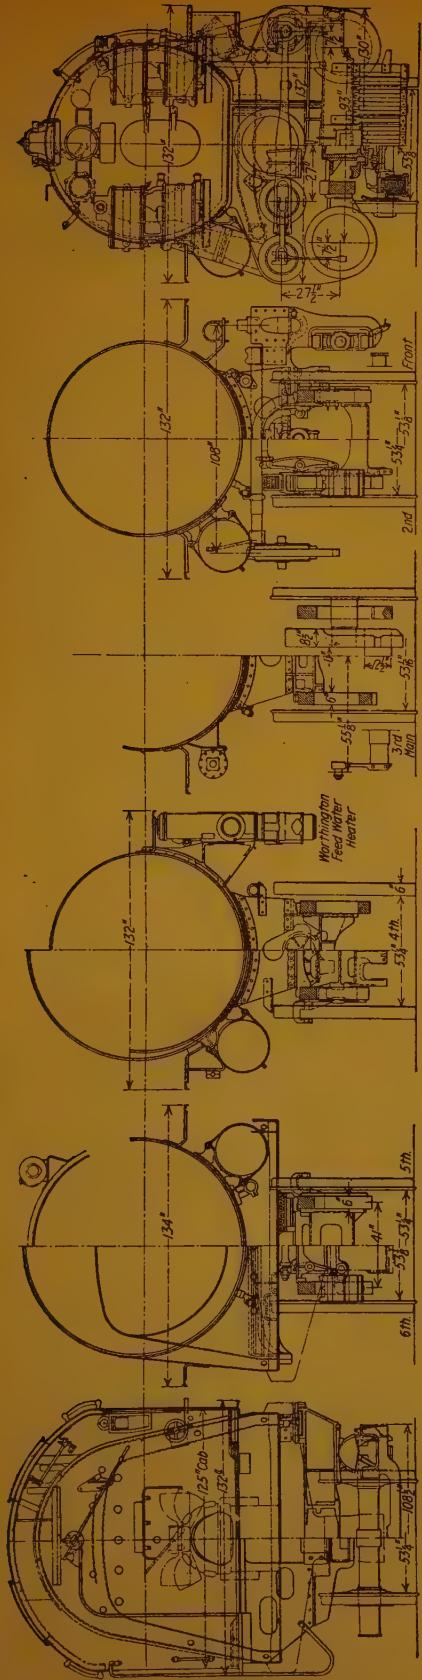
Elevation and cross section drawings of the Union Pacific type locomotive No. 9000.
